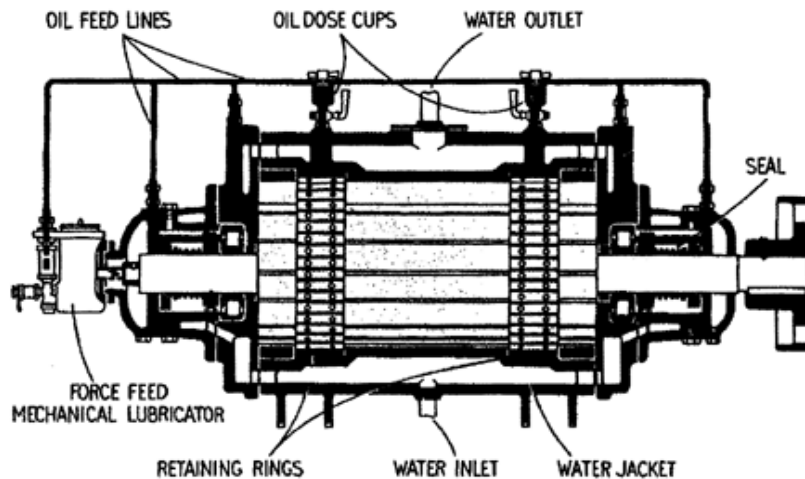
Side View Cutaway of Large Sliding Vane Compressor
